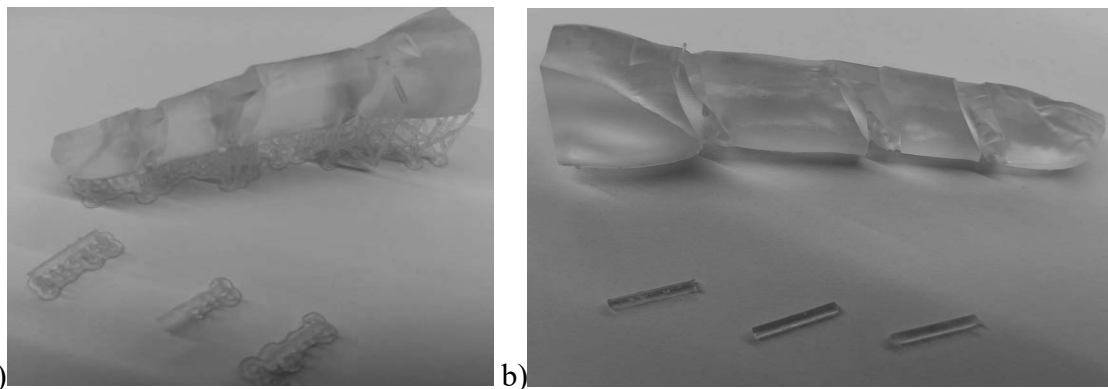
Printed finger elements: a) with support; b) after removal of supporting structures.
